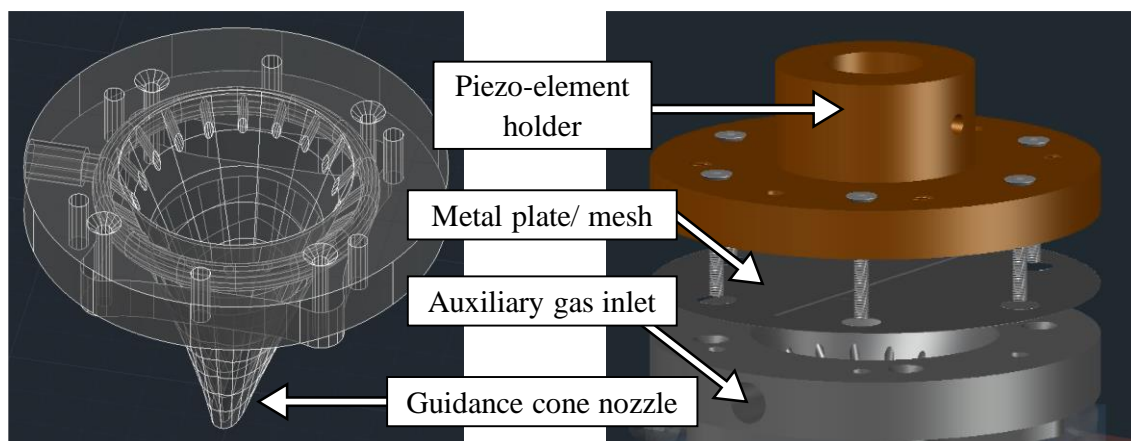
CADs of the cone in X-ray view (left) and in exploded realistic view with the mesh and the piezo-element holder (right).
